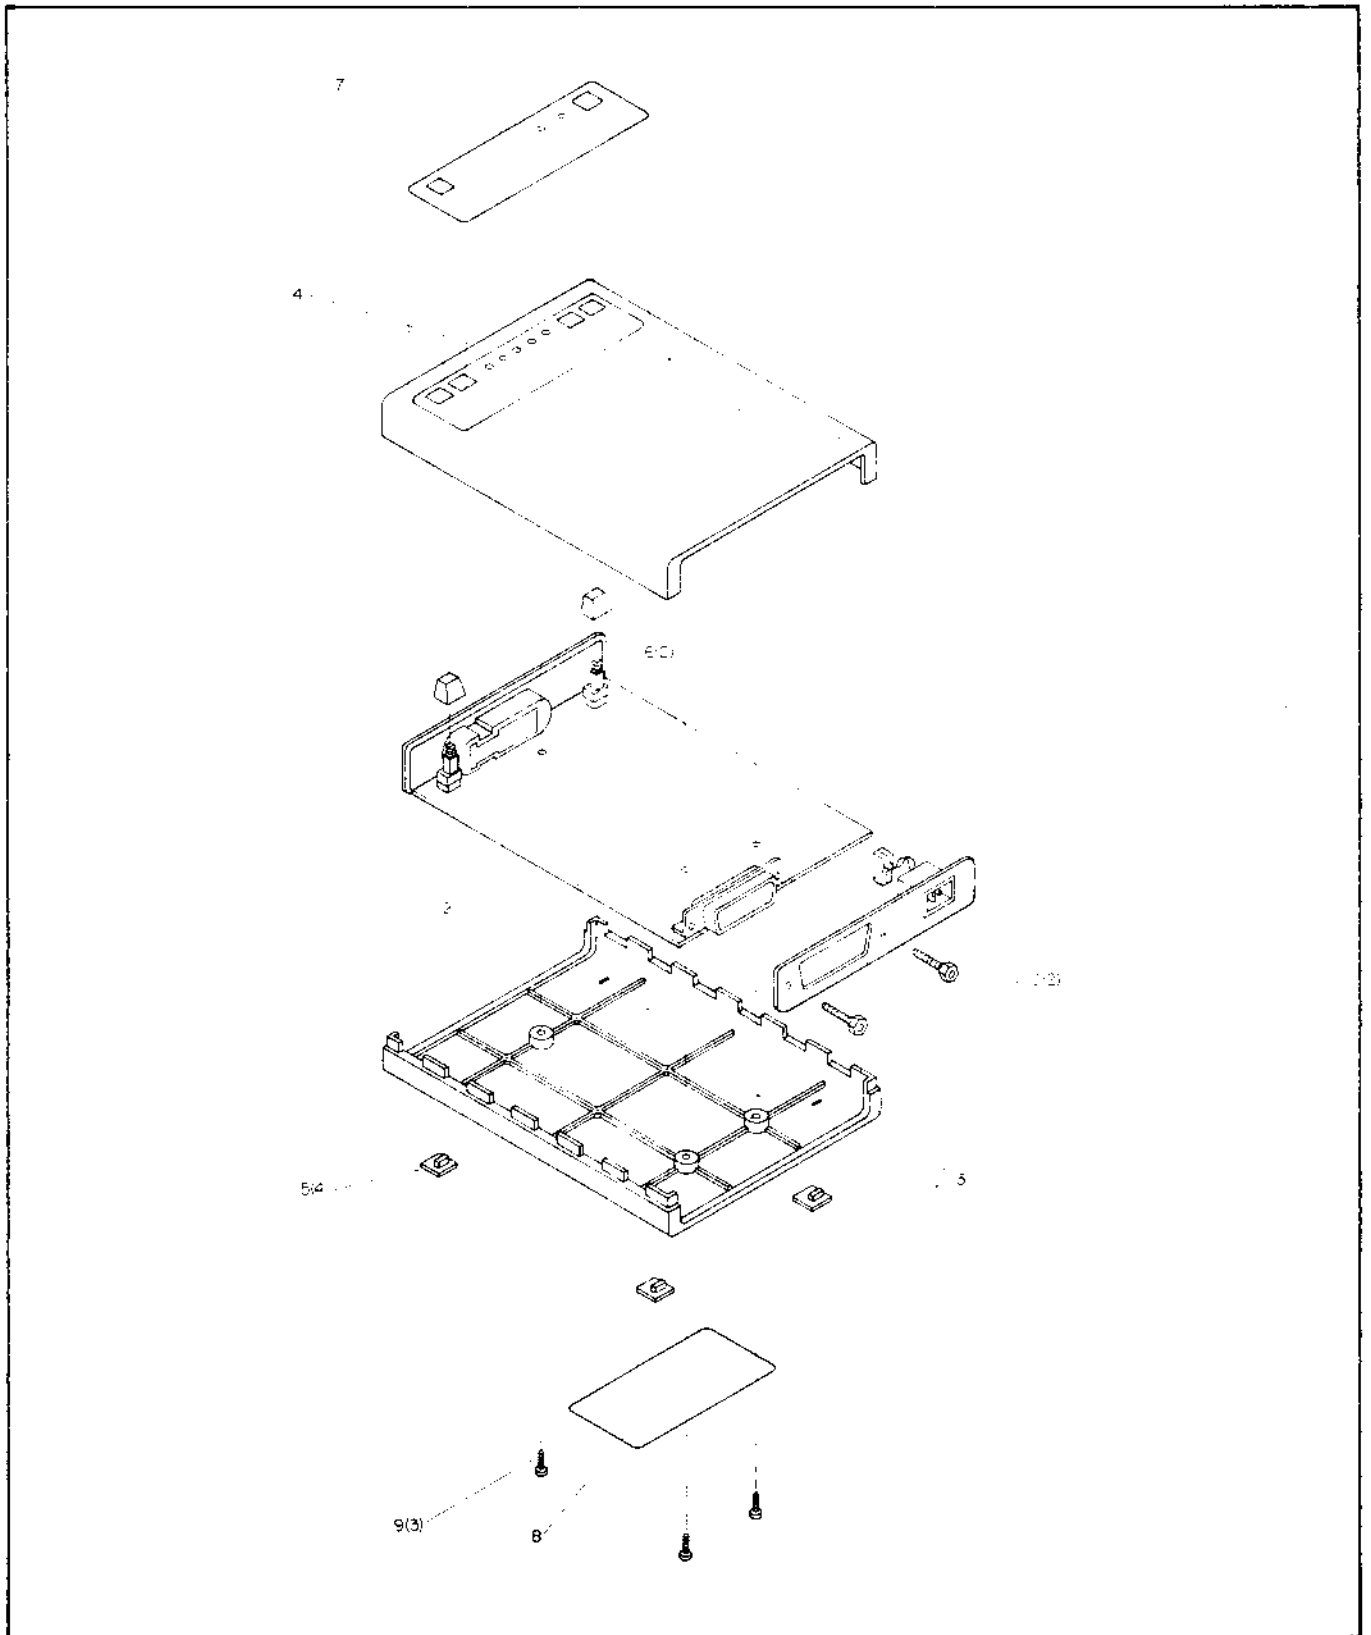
HP 82164A HP-IL/RS-232-C Interface Exploded View
